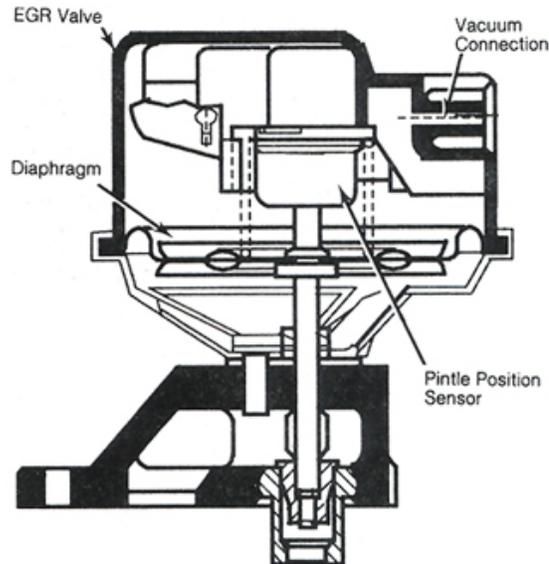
Cutaway View of Integrated Electronic EGR Valve
